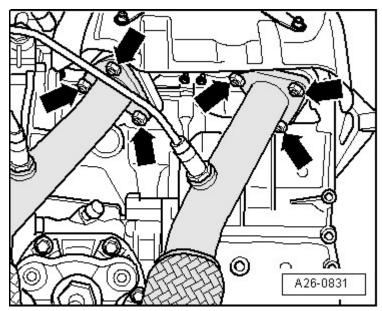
Front Exhaust Pipe Nuts And Exhaust Manifolds Courtesy of AUDI OF AMERICA, LLC
